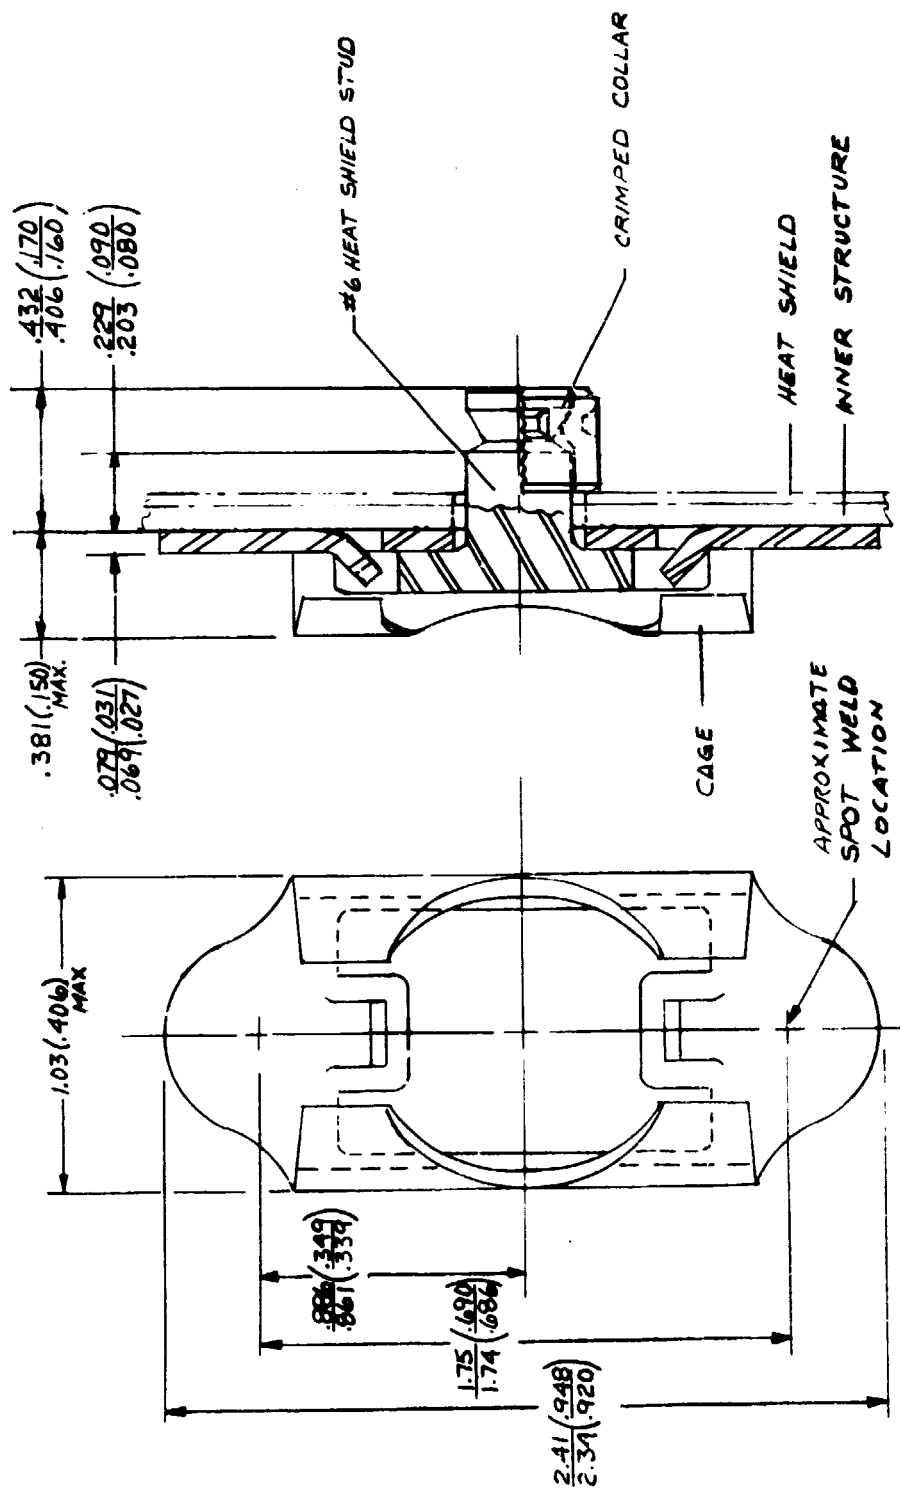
Caged Type #6 Fastener with Collar Retainer, Assembly.
